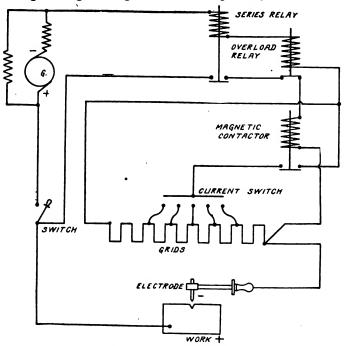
Wiring Diagram for C & C Welding System
